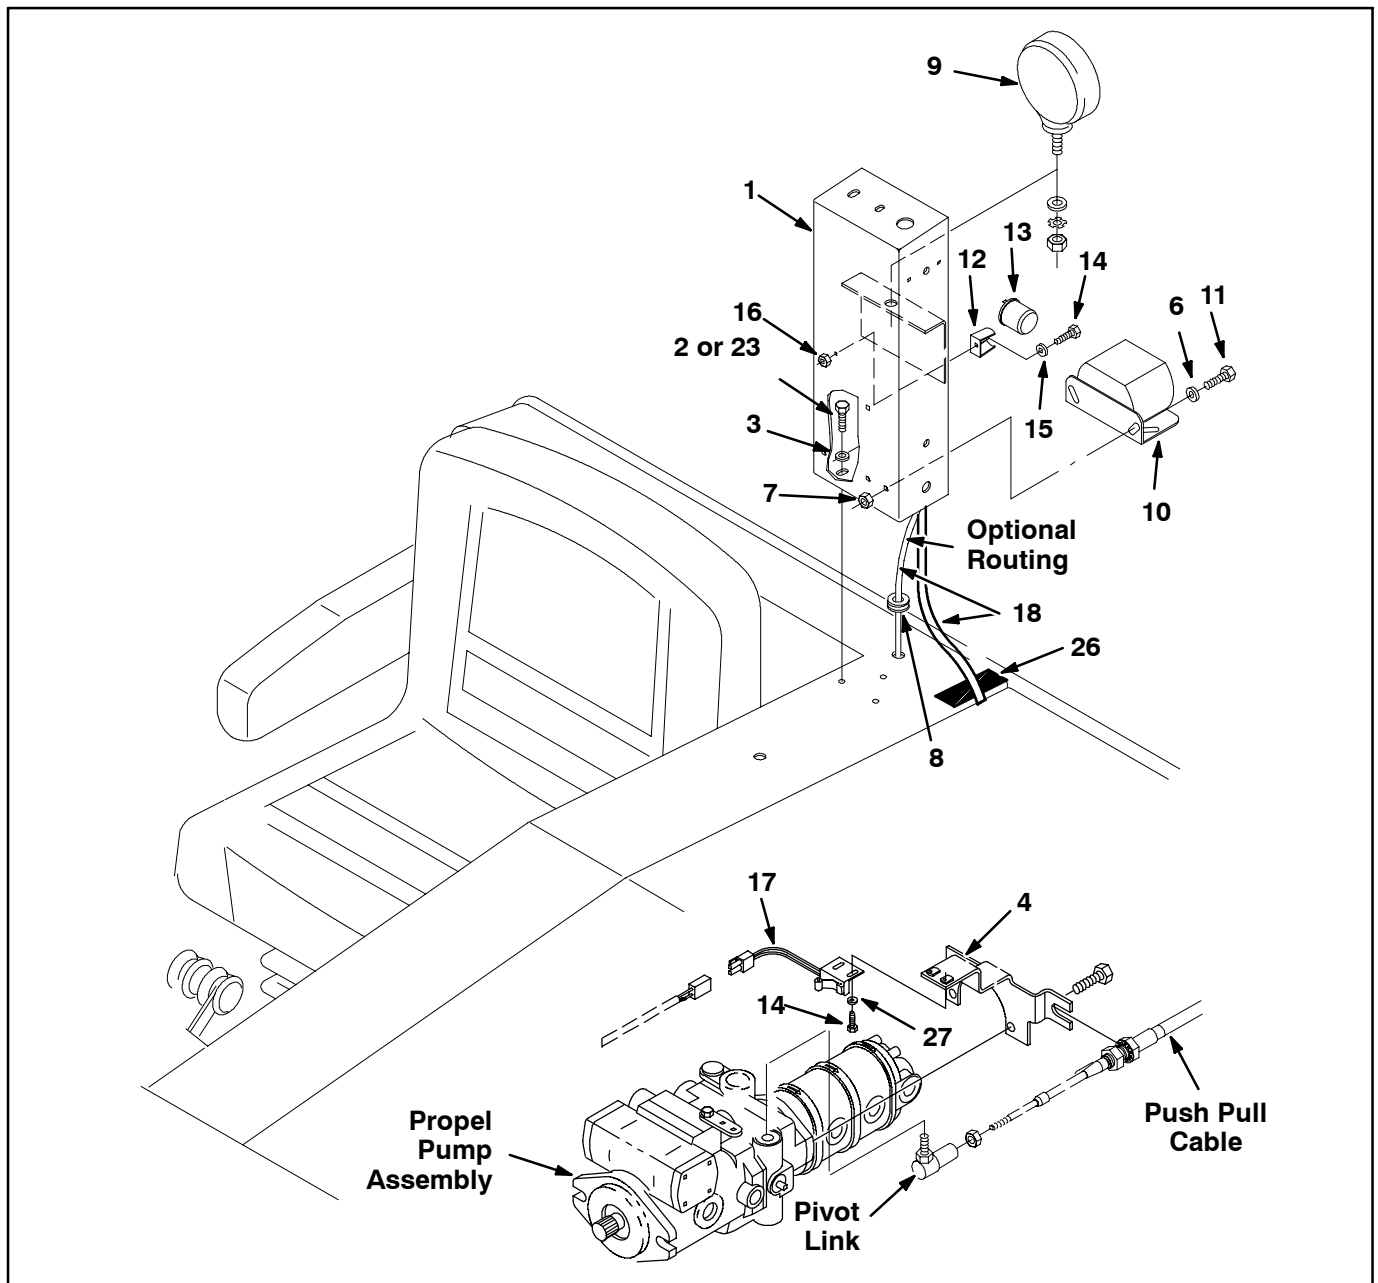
Backup Alarm and Switch Assembly (without Blower Wand)
